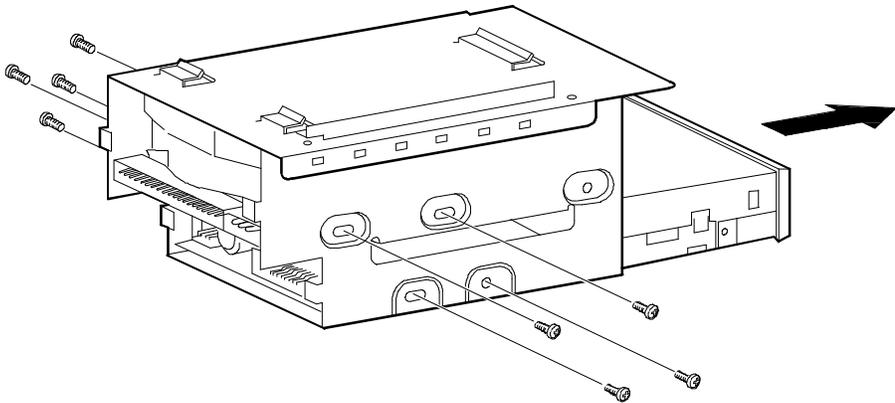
13 Removing the Lower Drive Bay Assembly
